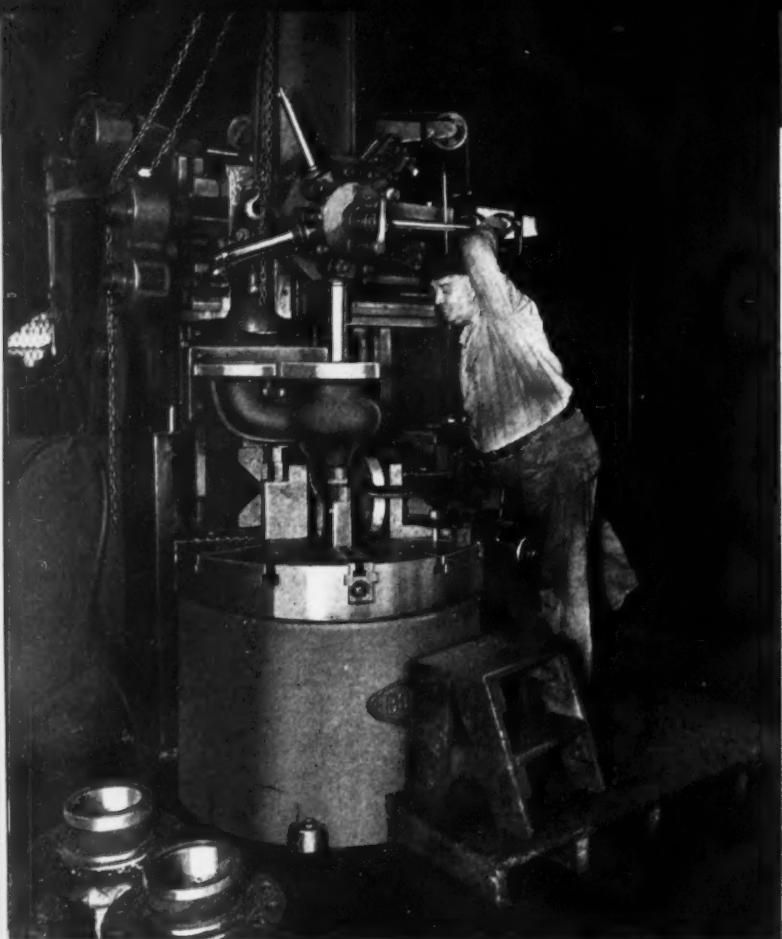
Valve Boring and Facing Operation on a Vertical Turret Lathe, which is Typical of the Work Assigned to This Machine
